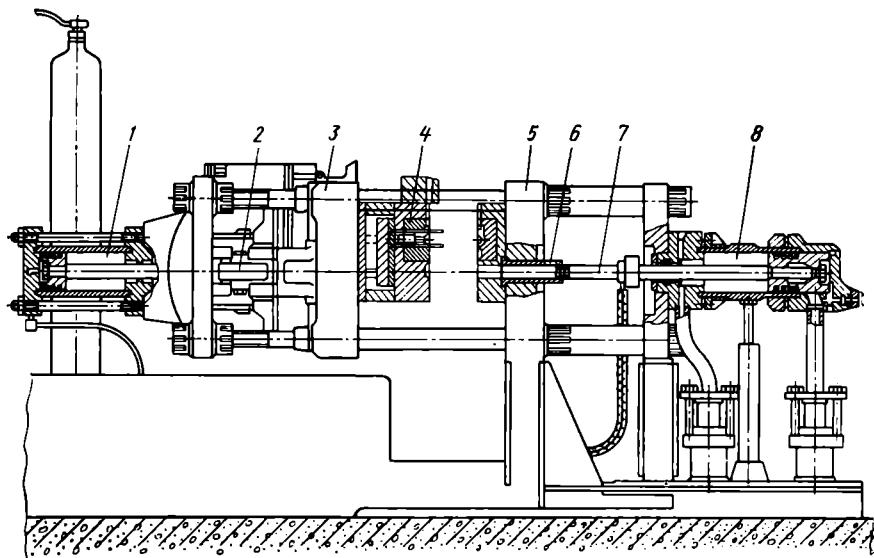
Horizontal-plunger cold-chamber die-casting machine
